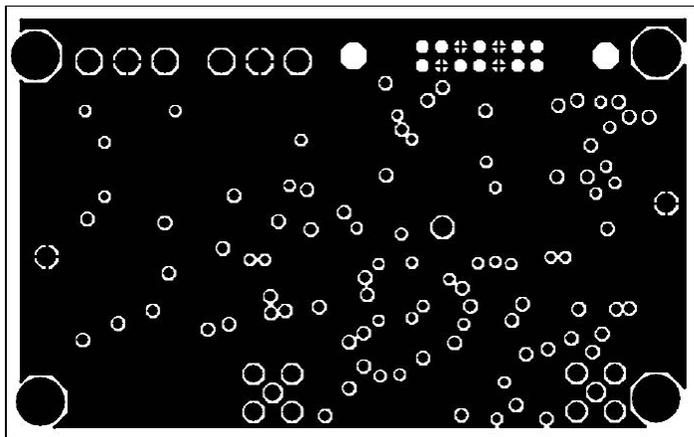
Layer 3 (ground plane) of the PCB layout
